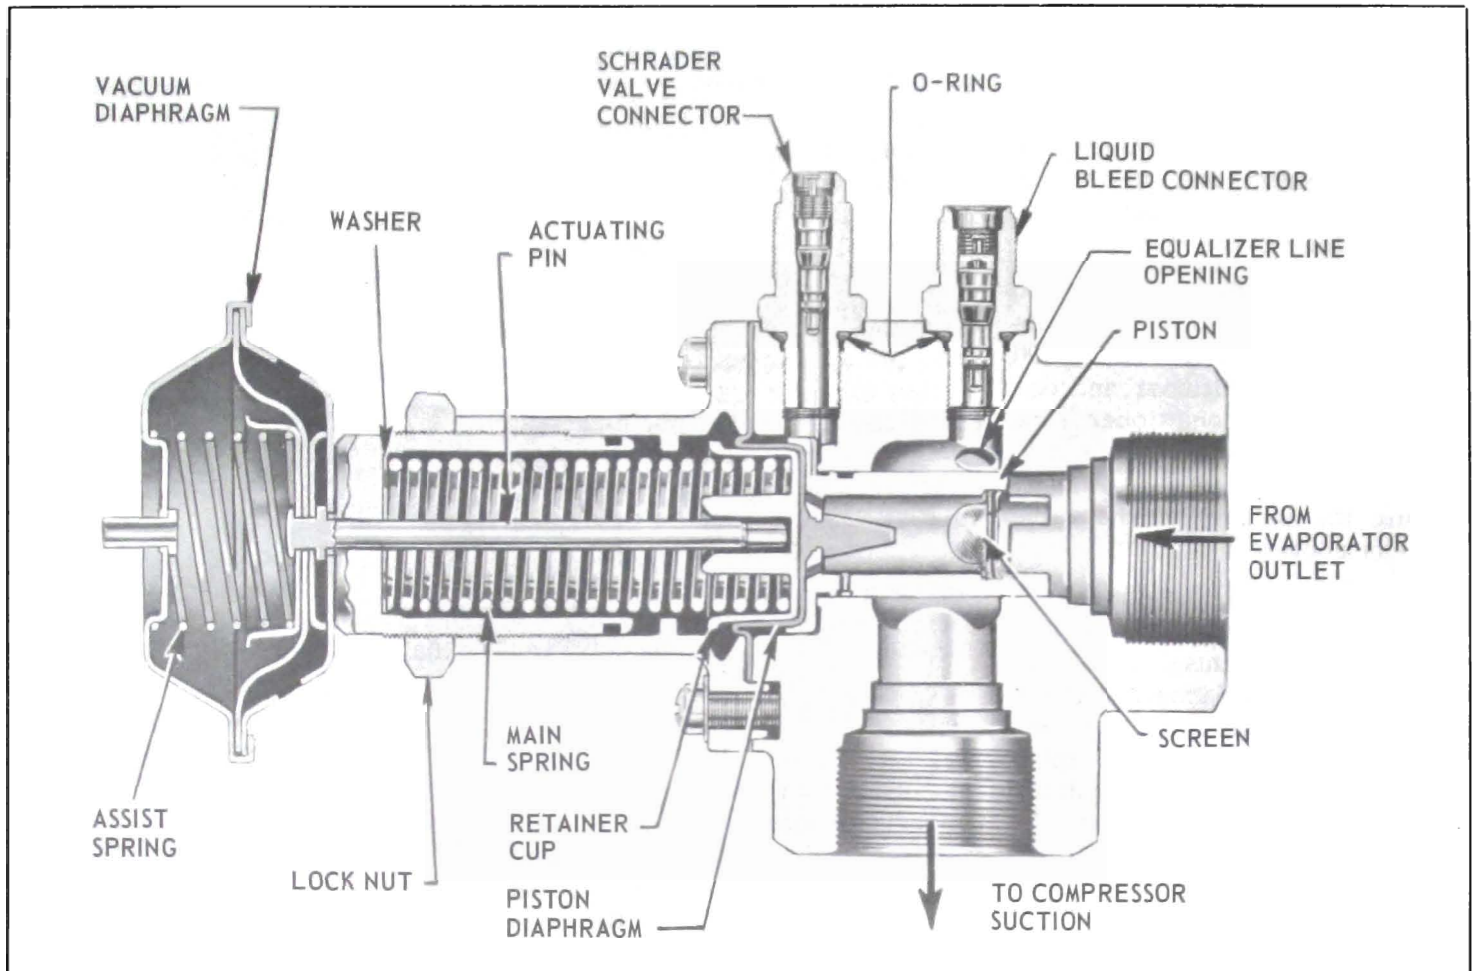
Suction Throttling Valve - 4400, 4600 and 4800 Series
